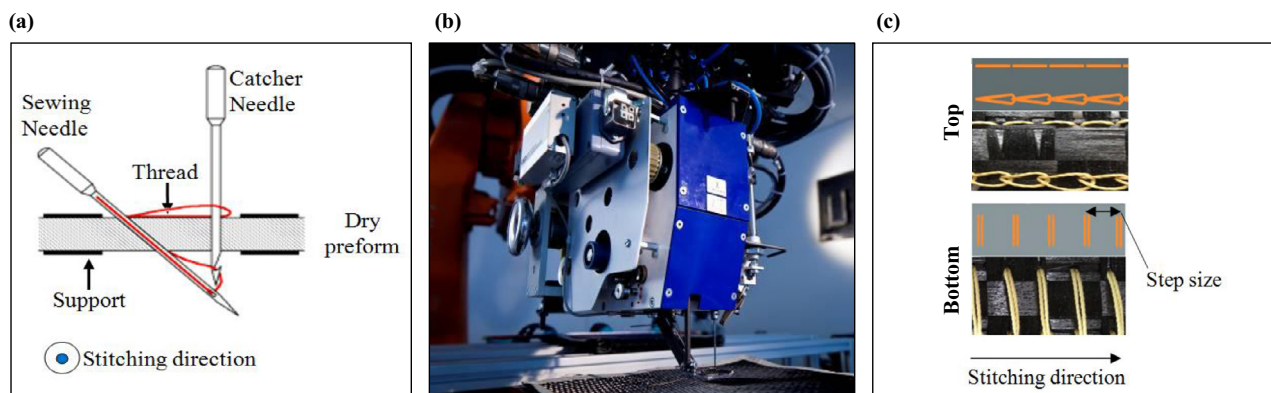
(a) Illustration of the manufacturing process OSS. (b) OSS head in process with Kuka Robot. (c) Stitching thread pattern on the top and bottom surface side of the fabric.
